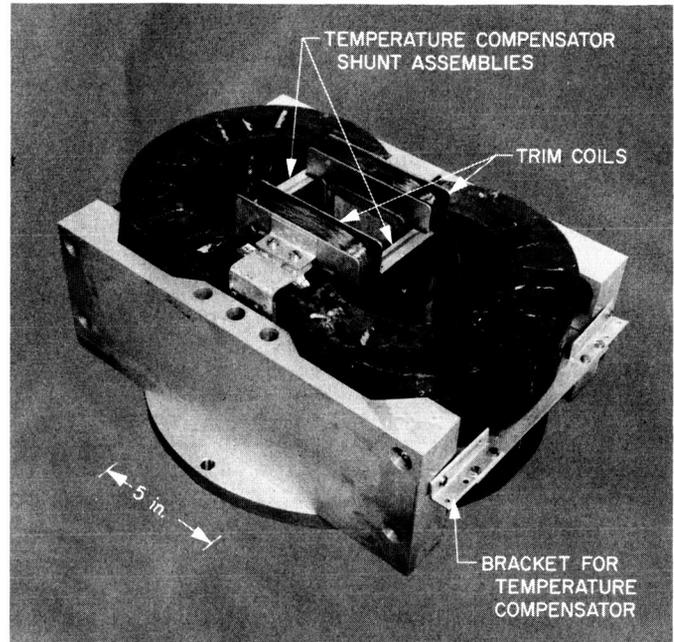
TWM magnet assembly showing location of temperature compensator shunts
